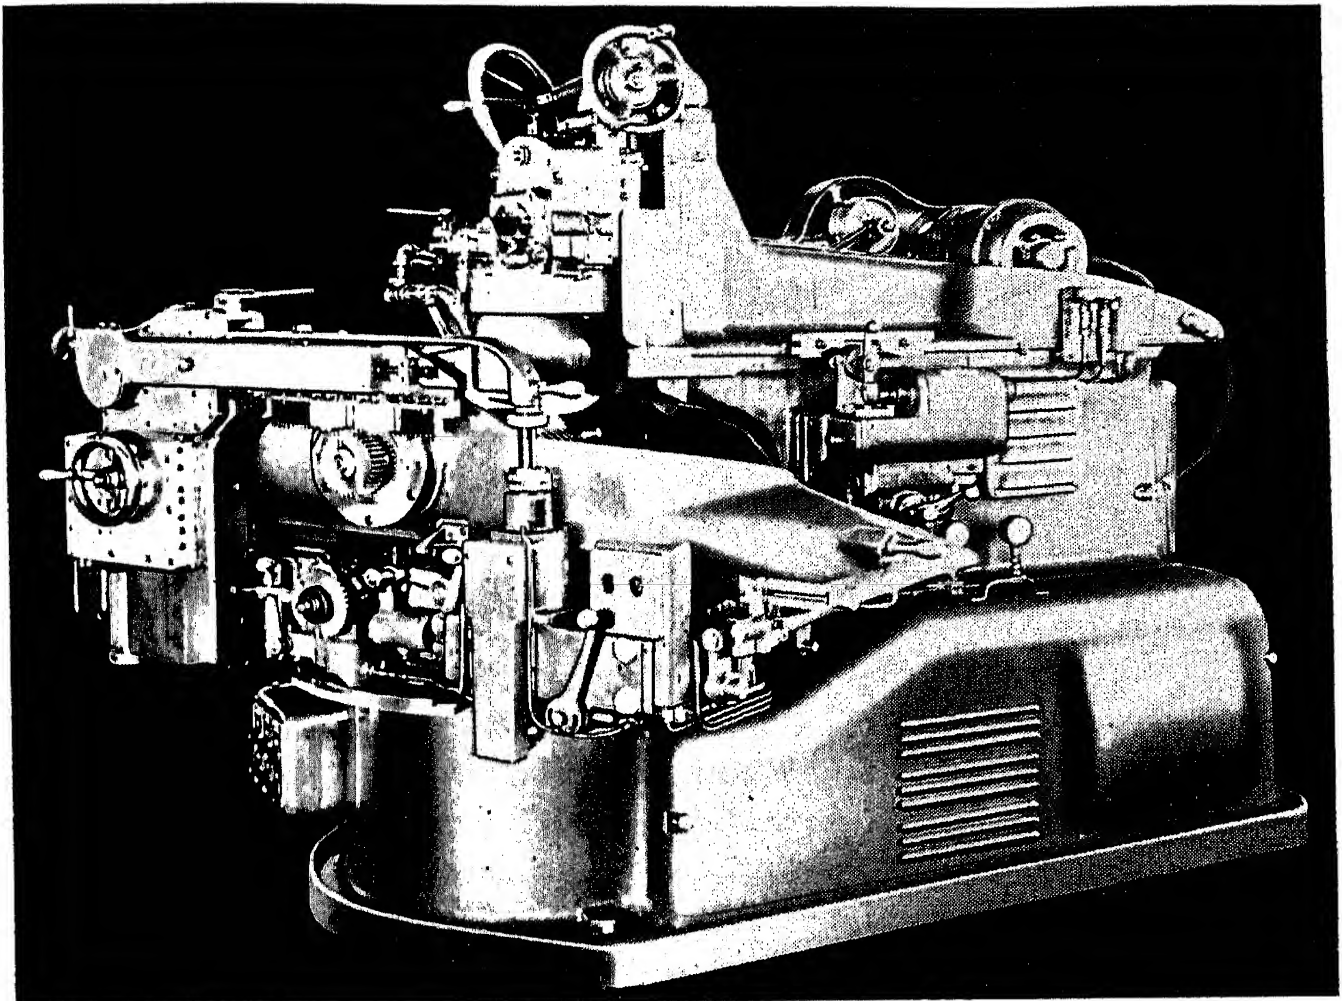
A 10 in. hydraulic gear grinder for spur and helical gears. (Pratt and Whitney Photo from Pratt and Whitney Division, Niles-Bement-Pond Co., West Hartford, Conn.)
